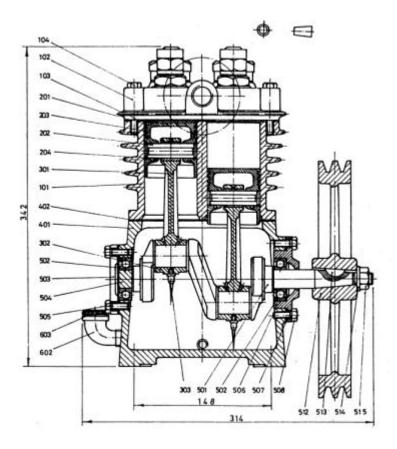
Crankshaft with its assembly drawing of the air compressor.
